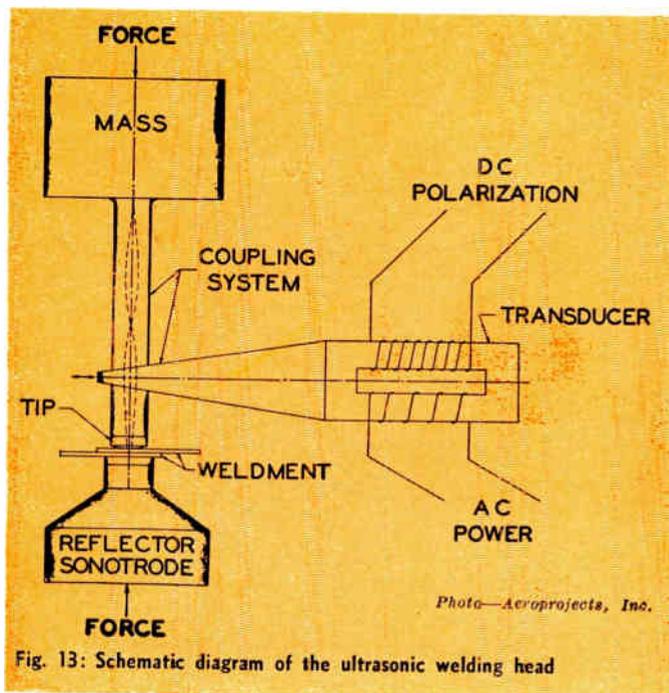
Schematic diagram of the ultrasonic welding head
